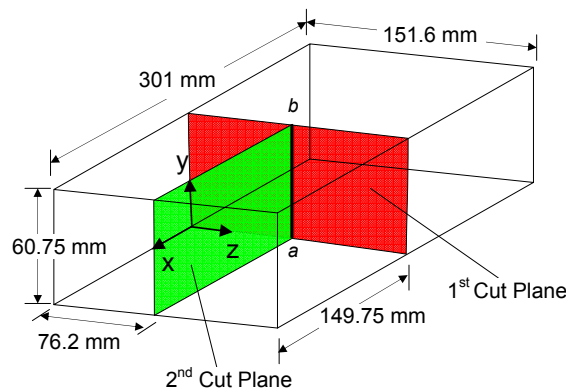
Dimension of the HSLA specimen and cut locations.
